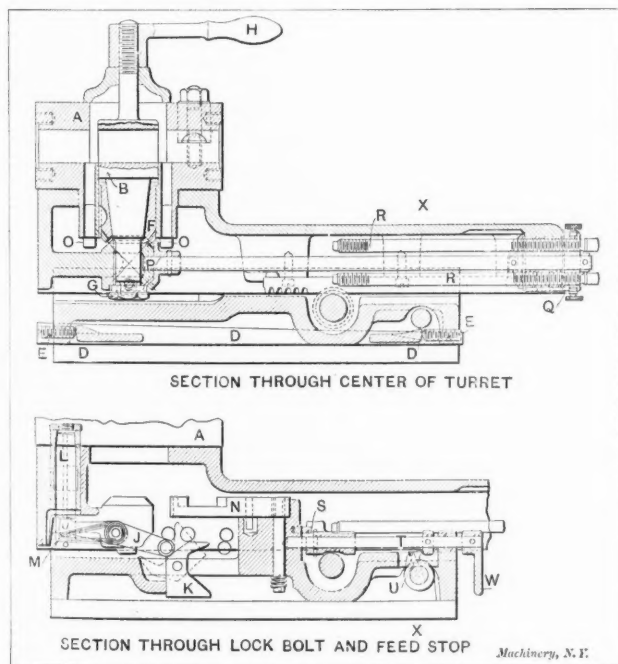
Longitudinal Sections, showing Turret Indexing and Feed Mechanisms
